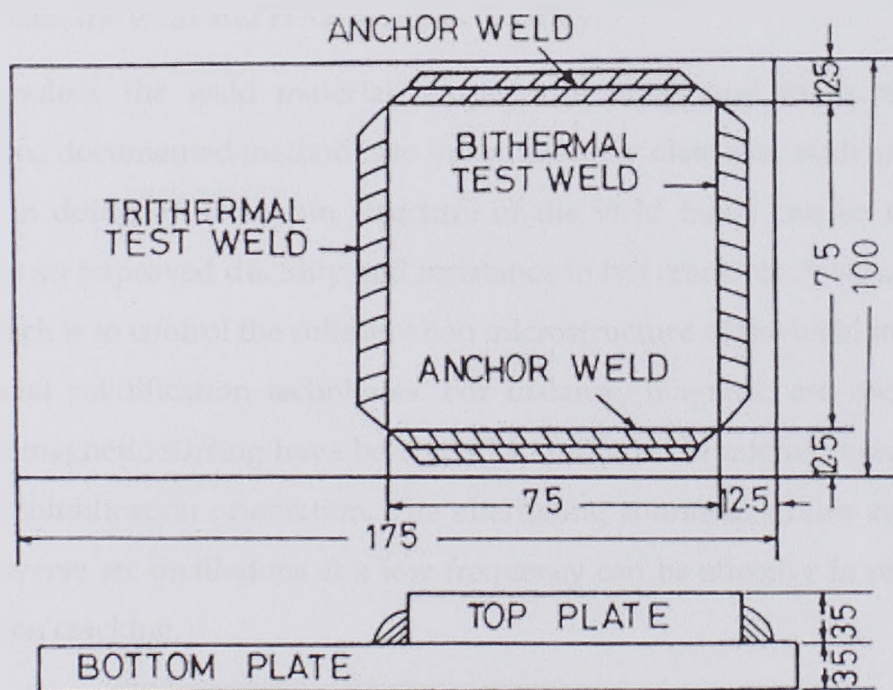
CTS test assembly (dimensions in mm).<sup>[78]</sup>
